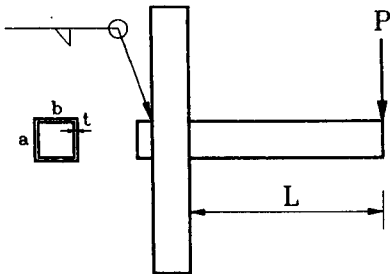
Configuration of a cantilever beam ($L=130$ mm)
